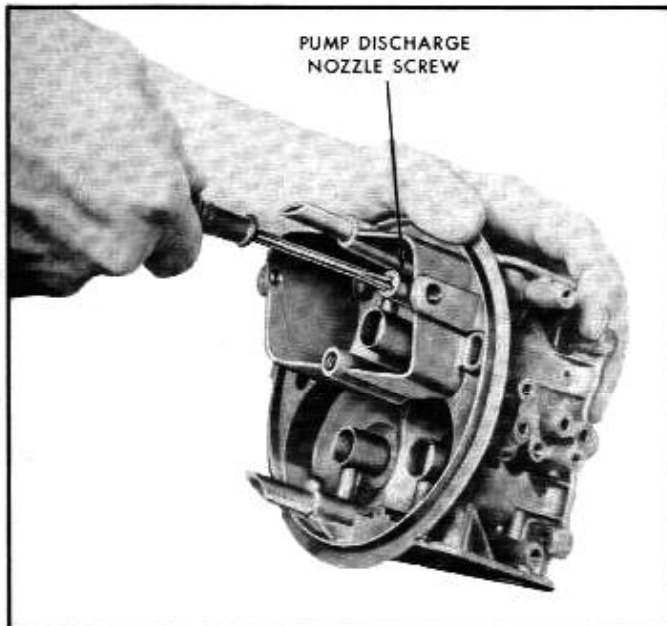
D-38—Removing Pump Discharge Nozzle Screw
